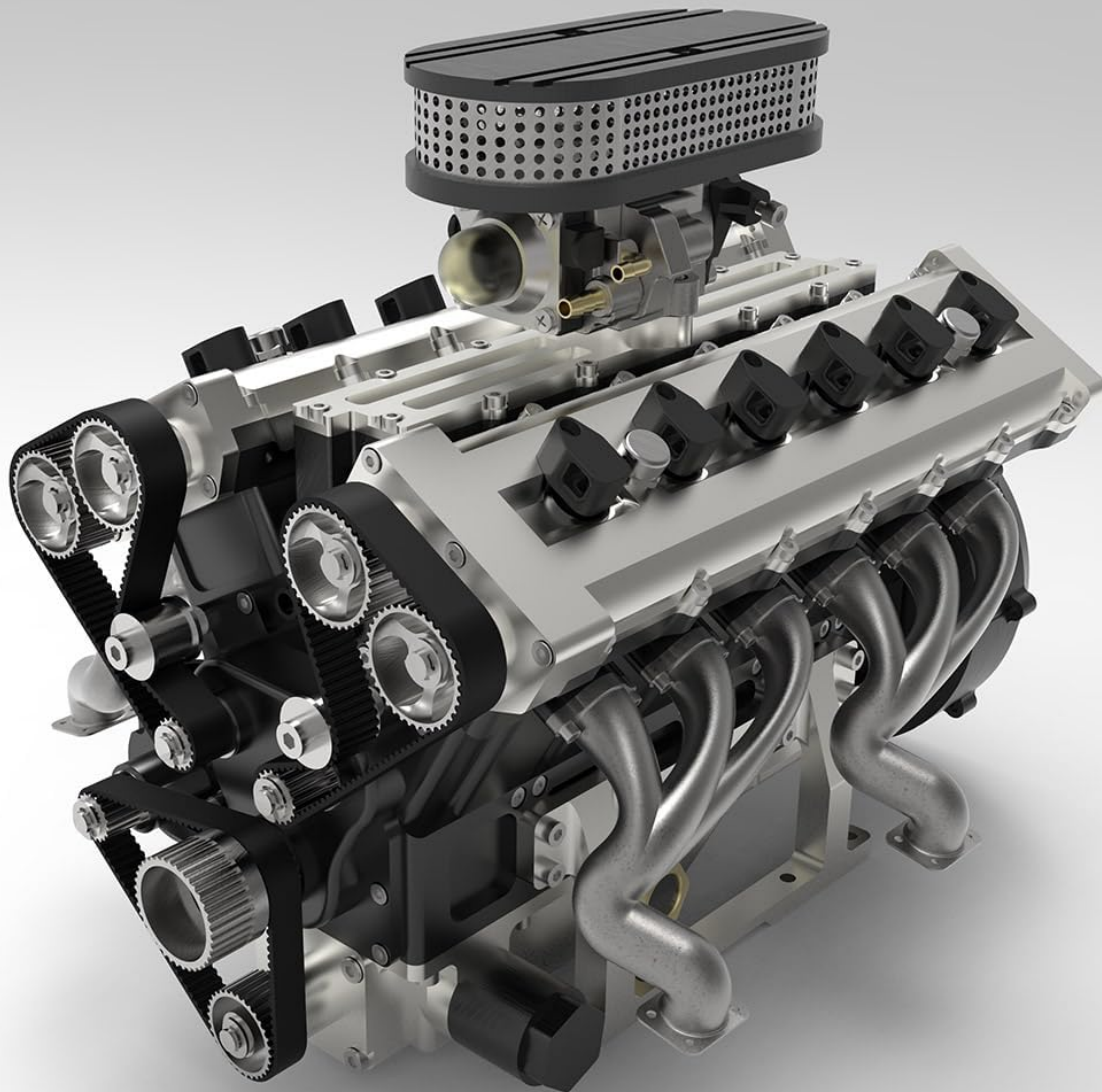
Front-left view of the ENGINEDIY GS-V12 engine model, showcasing its intricate design.
